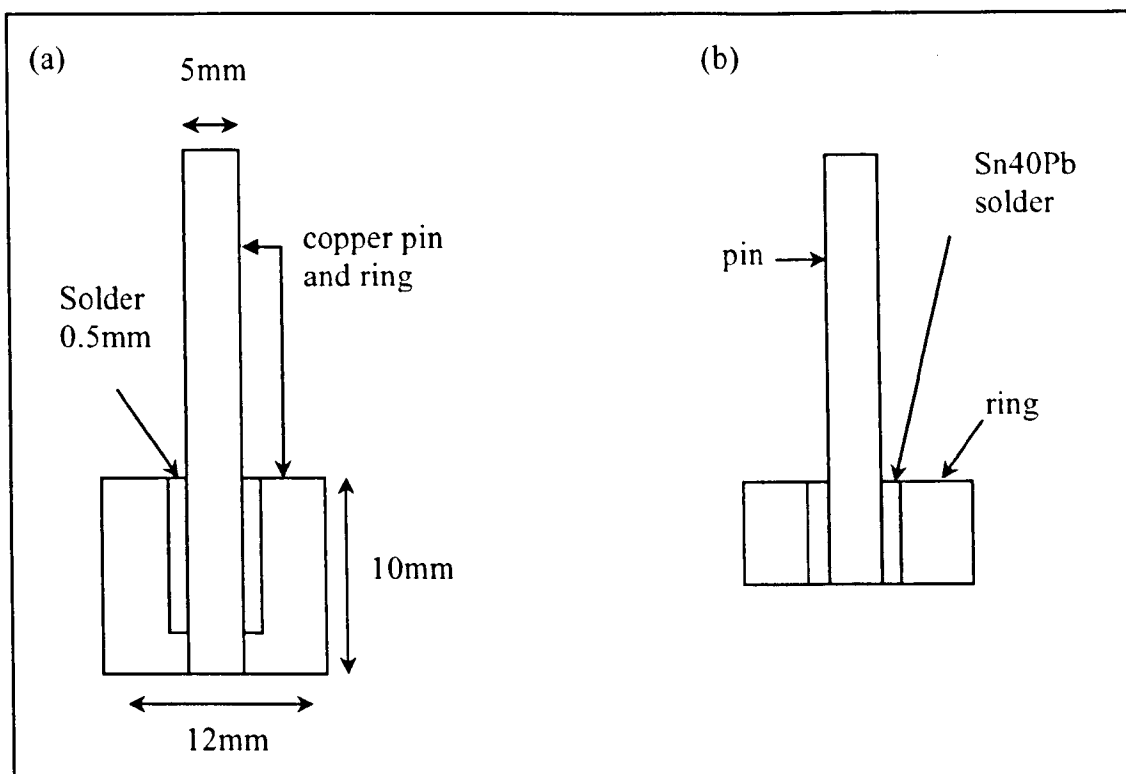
Pin in ring configuration used by Gillot and Rod.
